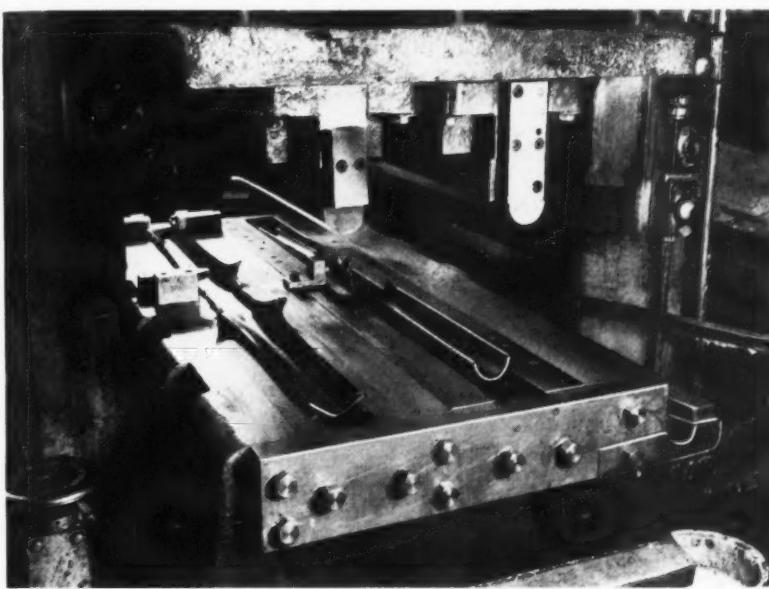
Final Forming and "Restrike" Operations on Rear-axle Housings Performed in a Hydraulic Press with a Two-station Die
